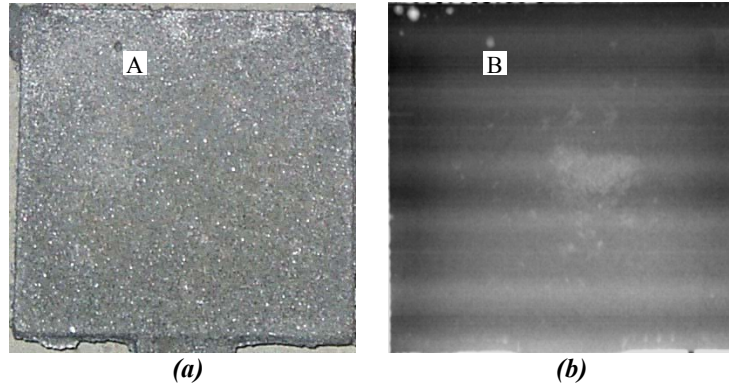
(a) Photograph and (b) digital x-ray of a casting with mold wash
